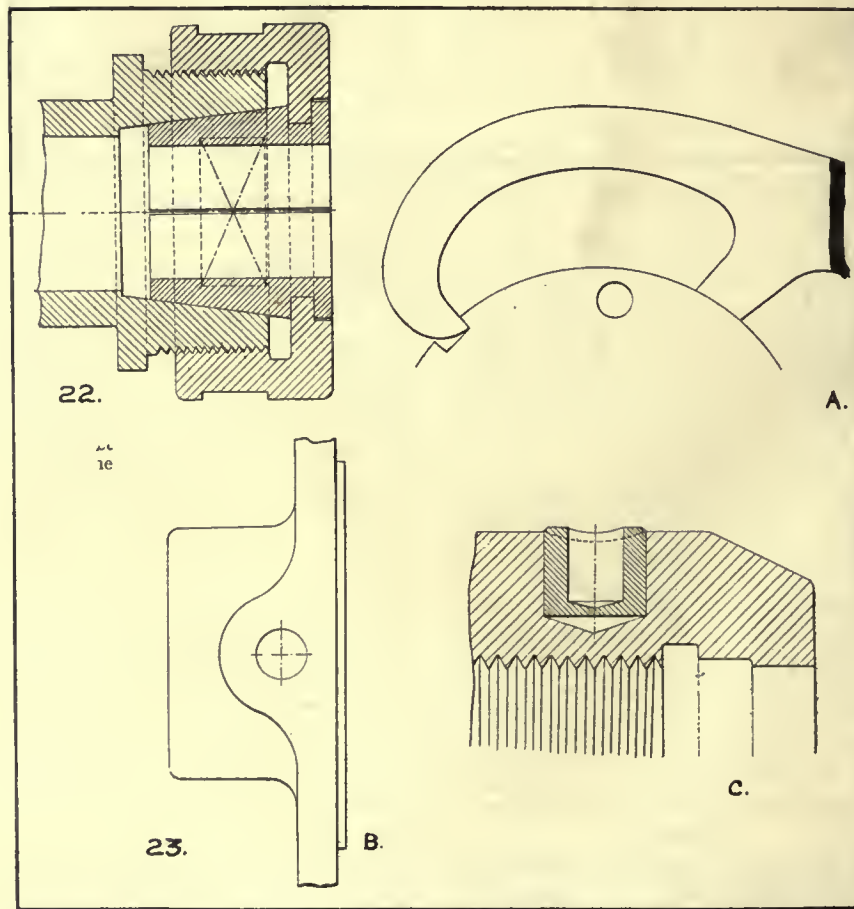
LOOSE GRIPS CLOSED BY TAPERED SPINDLE BORE.
